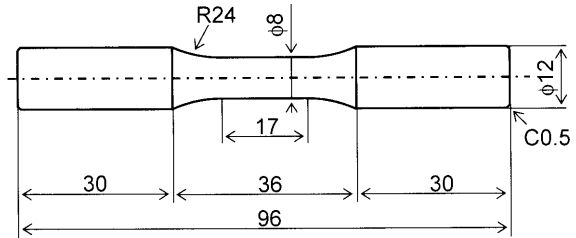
Shape and dimensions of rotating bending fatigue specimen.
